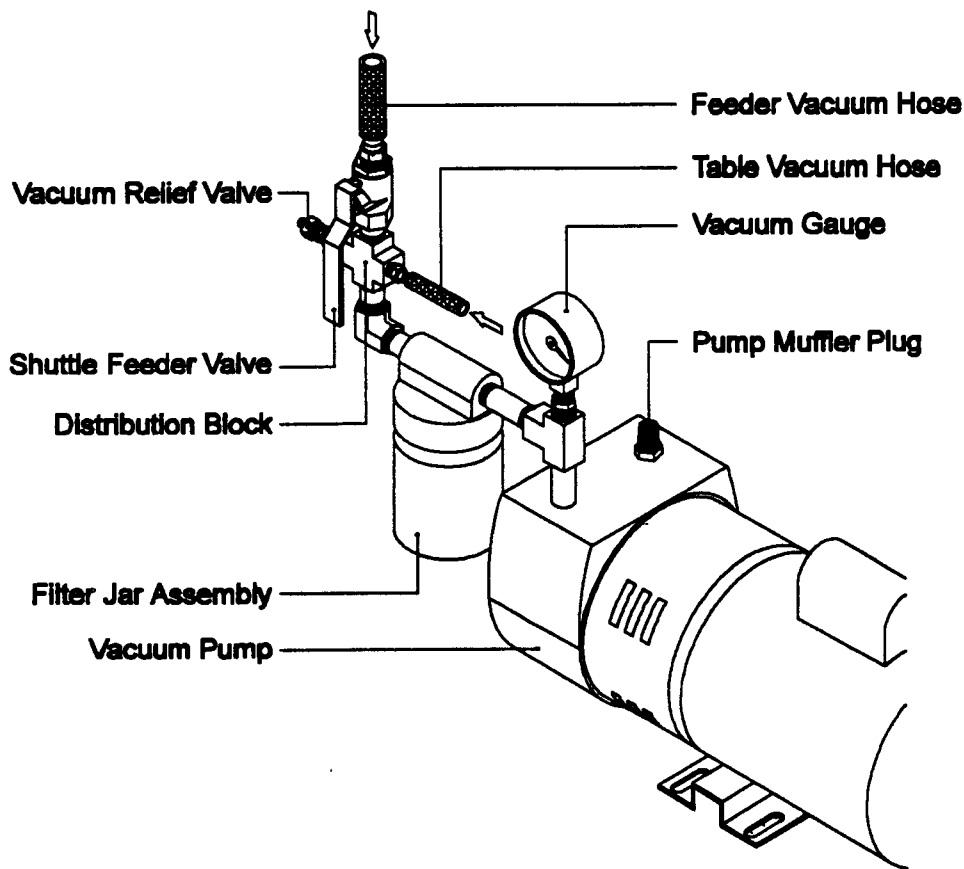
Vacuum Pump System illustrating relief valve, shuttle feeder valve, filter jar assembly, vacuum gauge and hose locations.
